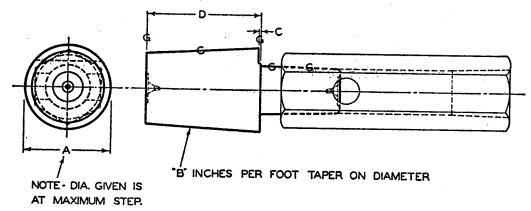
Recommended design of taper plug gage and method of dimensioning.
